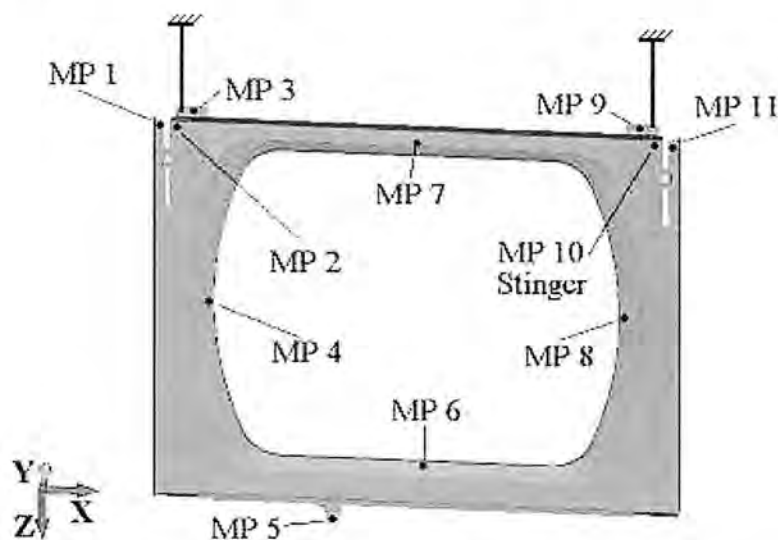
Measurement points, stinger and suspension positions pointed out on the upper front plate.
